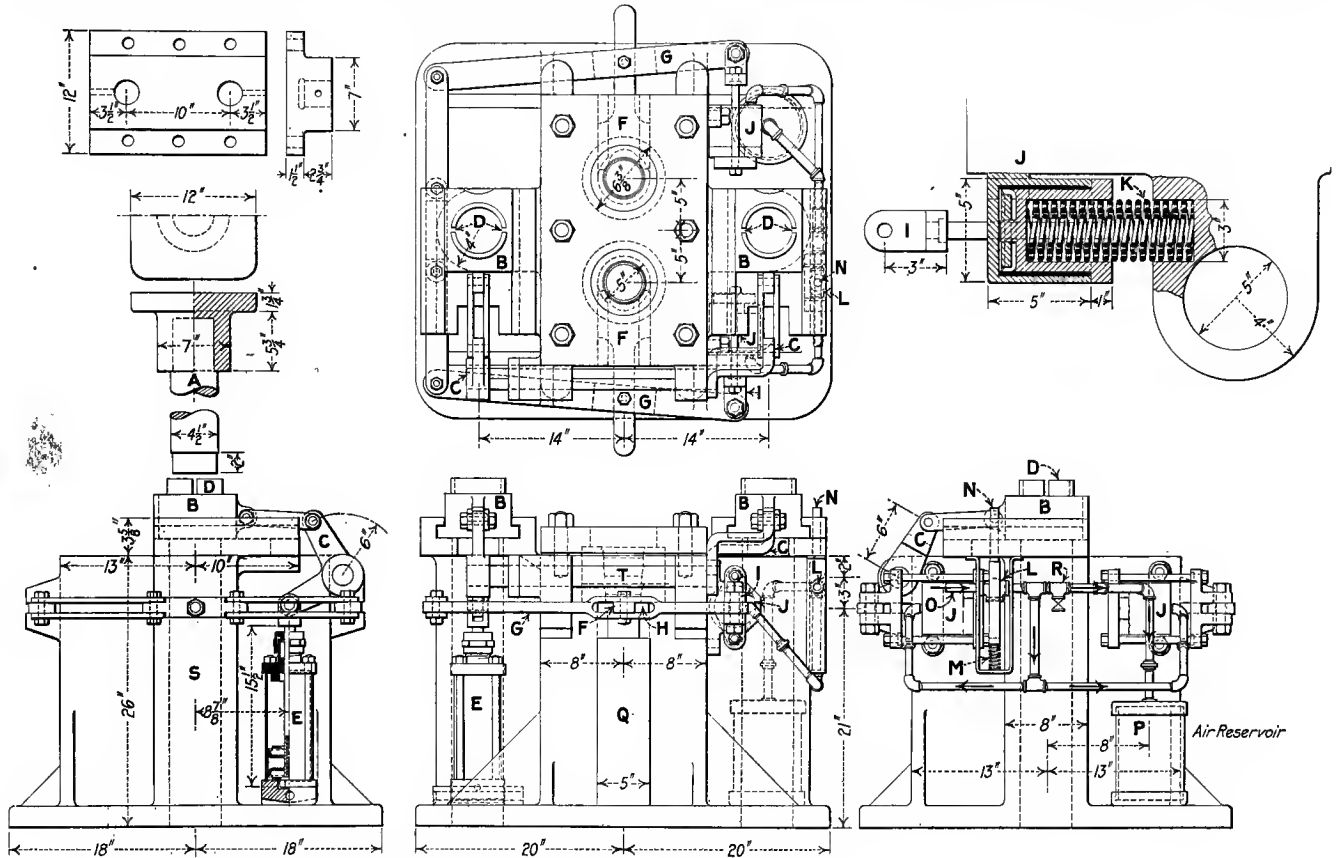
EQUIPMENT FOR SHELL-DRAWING WITH AUTOMATIC STRIPPERS AND BASE-FORMING STOPS
